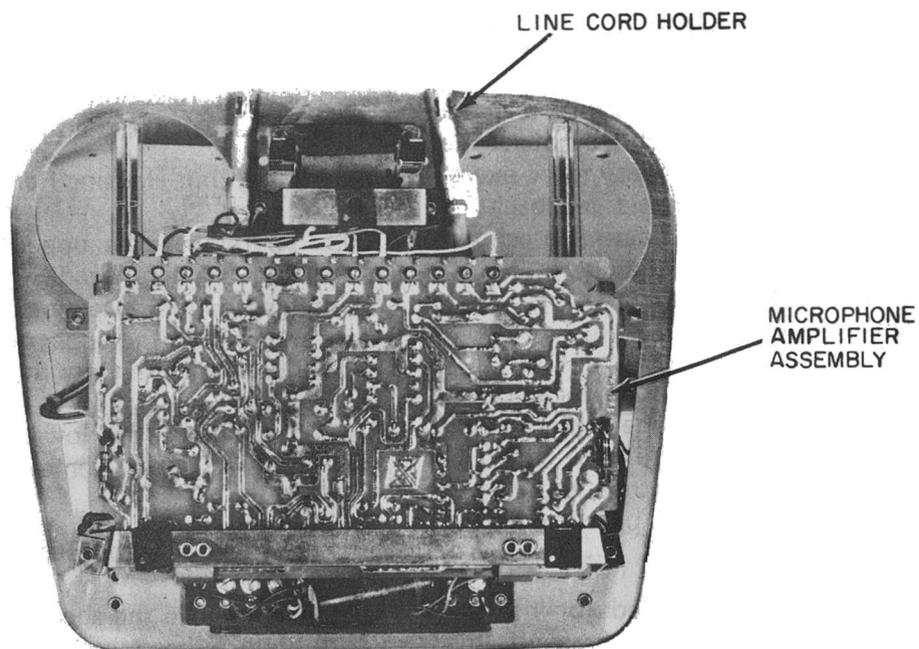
Bottom View of Main Unit Assembly with Lower Housing Removed.
